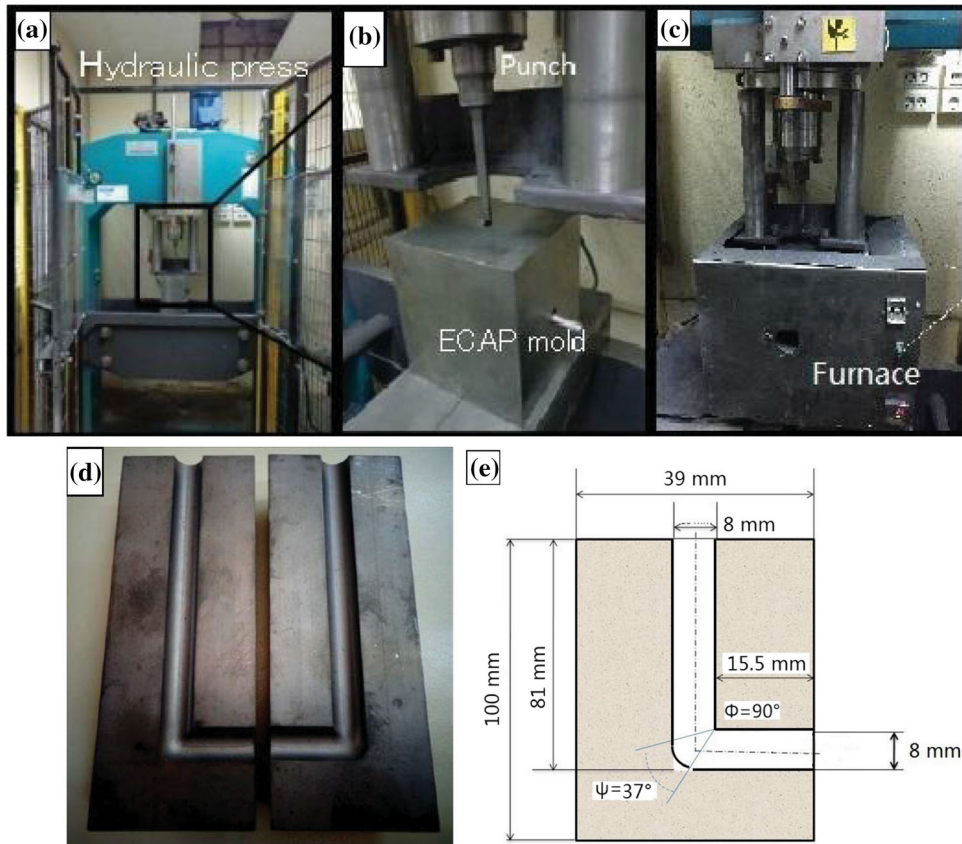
ECAP system and mold and insert dimensions: (a) hydraulic press, (b) ECAP mold, (c) furnace, (d) actual drawing of ECAP mold, and (e) die dimension drawing of ECAP mold
